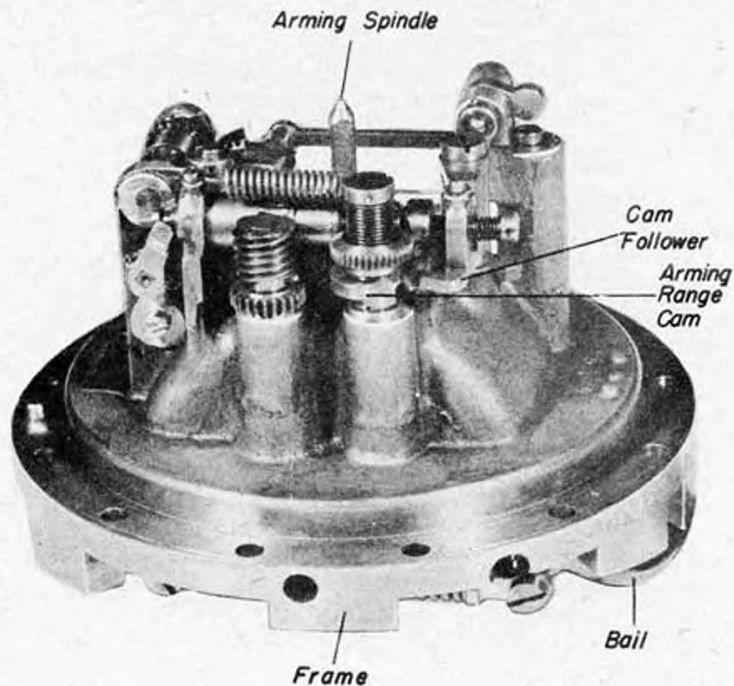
Exploder Type 2 Arming Assembly, Right Side
